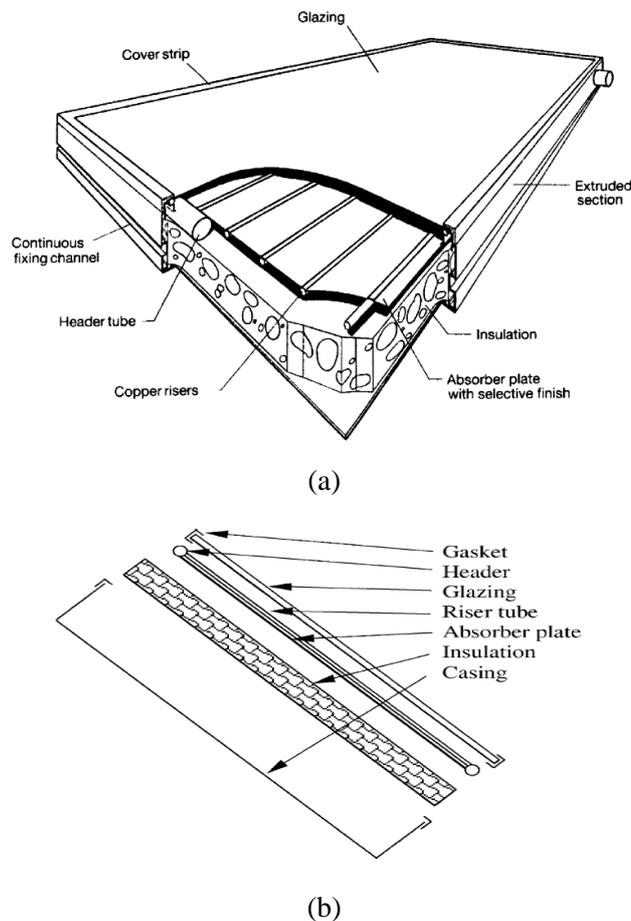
Schematic diagram of a typical flat plate collector (a) Isometric view (b) Exploded side view.
